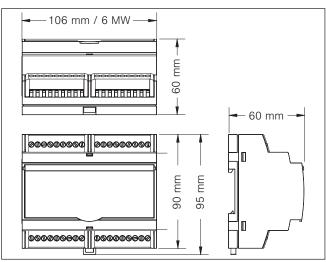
Dimensions of 6 MW DIN rail-mounted housing for KNX SA 6M230 REG and KNX SA 8M230 REG
